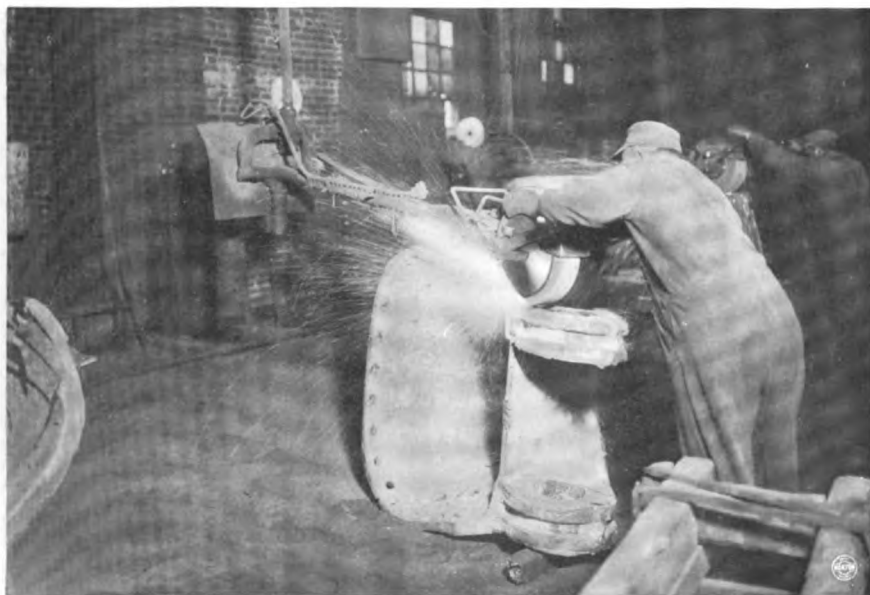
Giving a close-up of one of the above swing frame machines. The operator is snagging a gold dredge bucket
